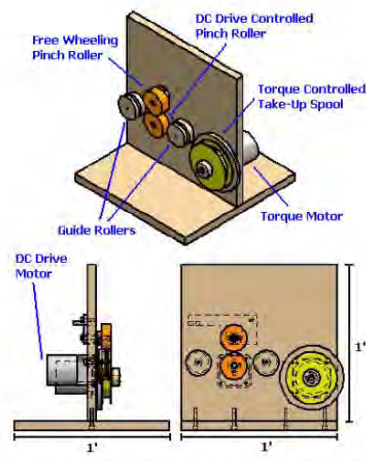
Wire take-up mechanism. Clockwise from top: 3-D view, front view, and side view.
